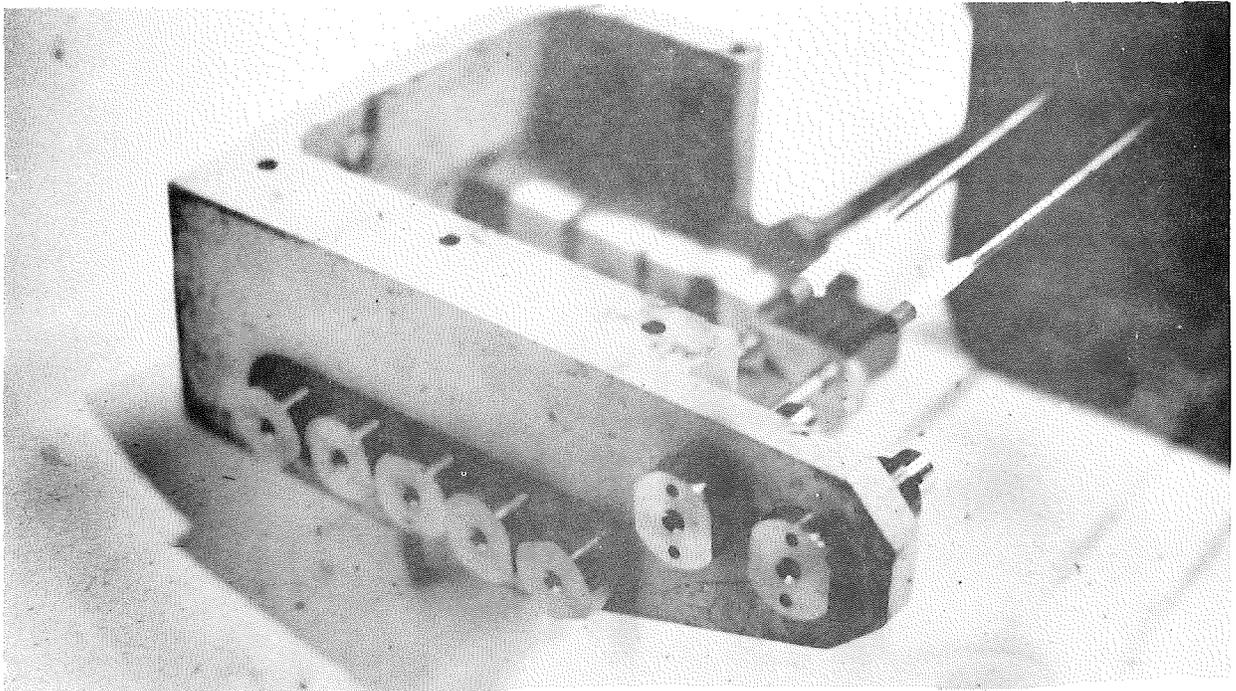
Front View of Small Manifold approx. $\frac{1}{4}$ scale
